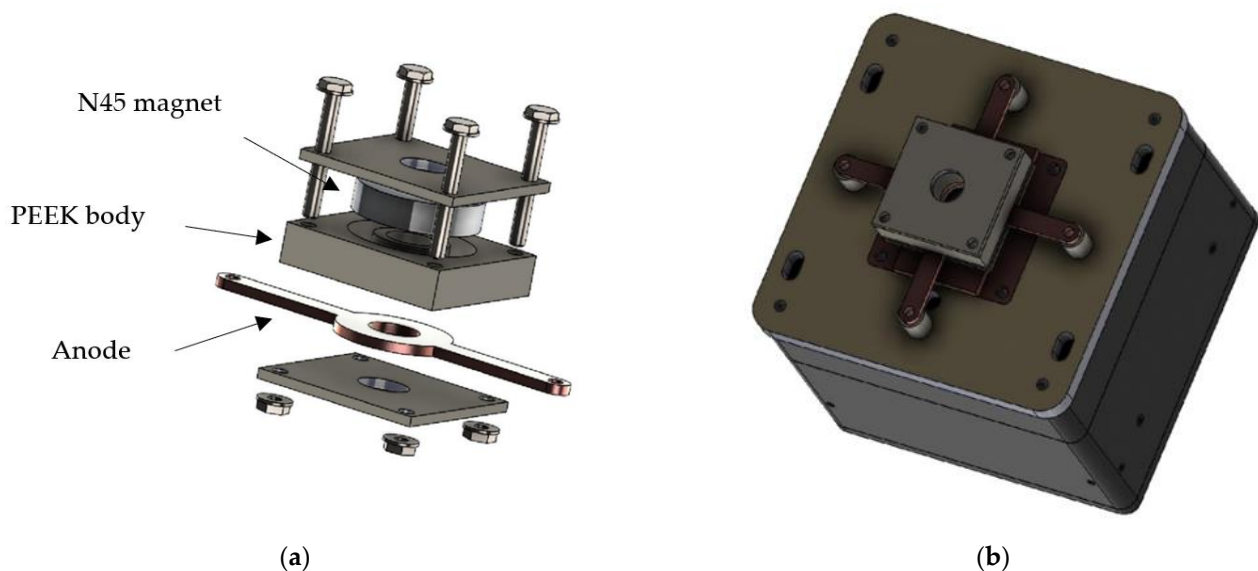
Magnetic nozzle used: (a) exposure view of the nozzle system; (b) CAD model of PJP with mounted magnetic nozzle.
